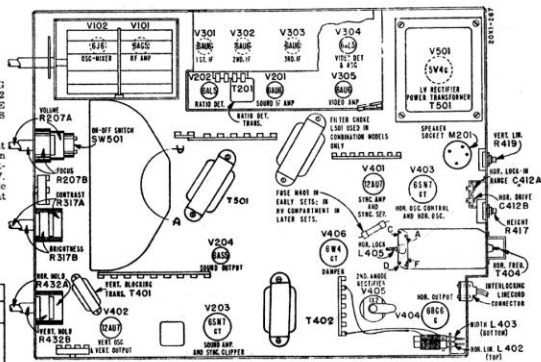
Bottom View of Television Chassis Showing Tube Locations.
